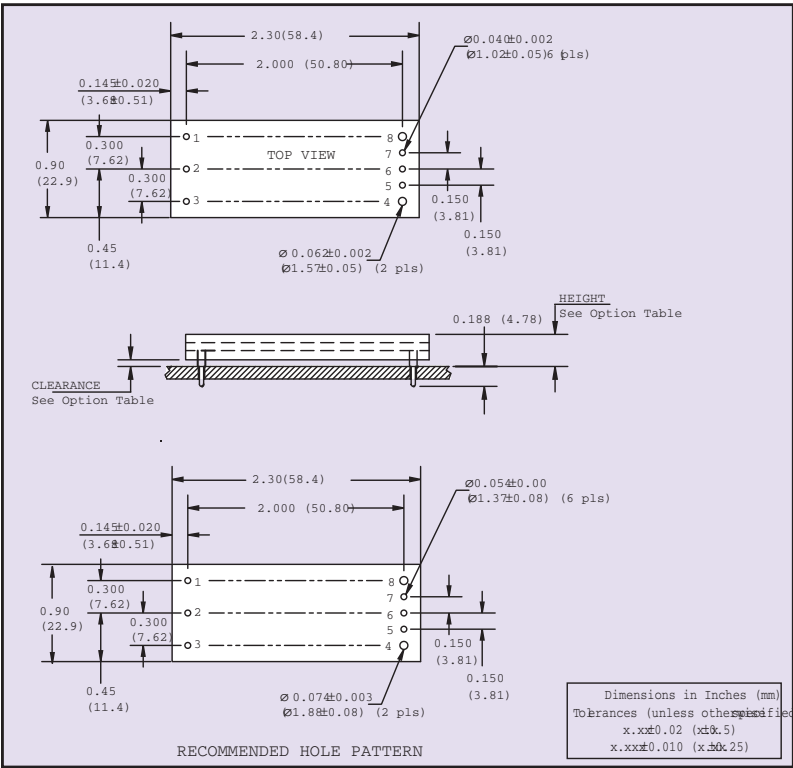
Through-hole Mechanical Drawing, Dimension Options and Pinout Table
